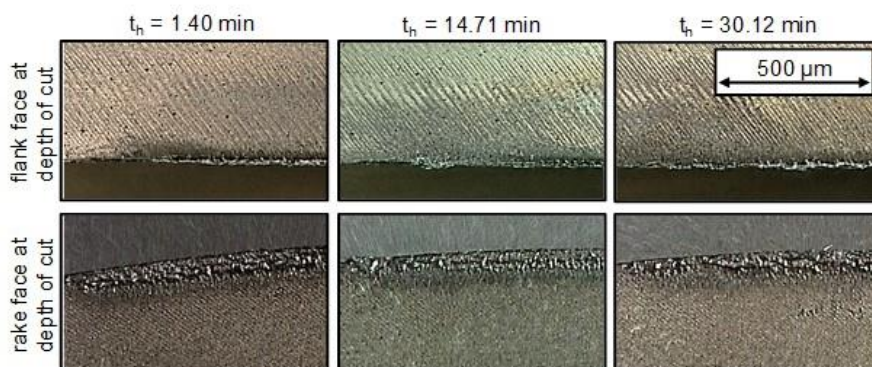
Tool wear of the flank and rake face of the carbide cutting tool in trimming of Ti-48Al-2Cr-2Nb
